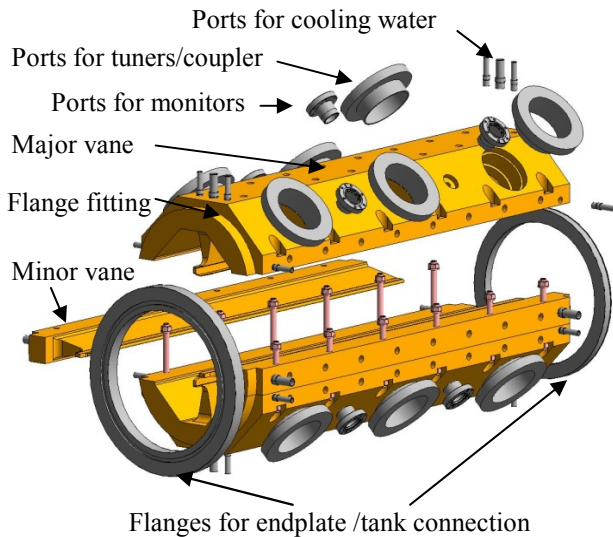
Assembling of vanes and other components of the unit tank for brazing.
